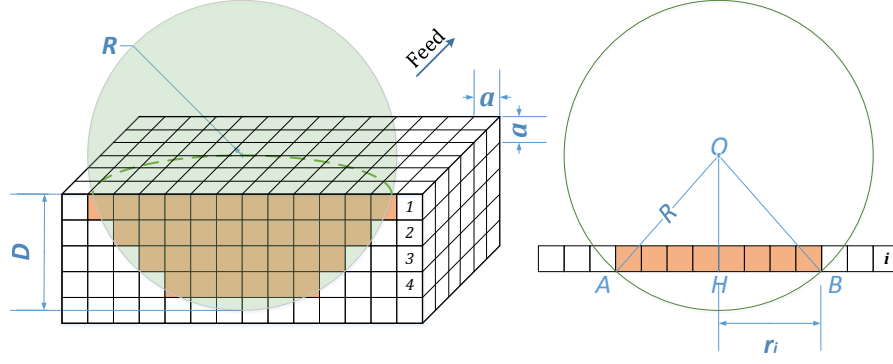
Voxelization of the workpiece-tool system in ball-end milling
